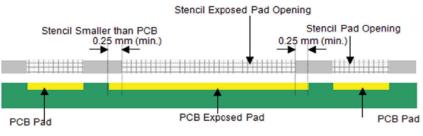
Reduced Solder Stencil Aperture for Exposed Pad
